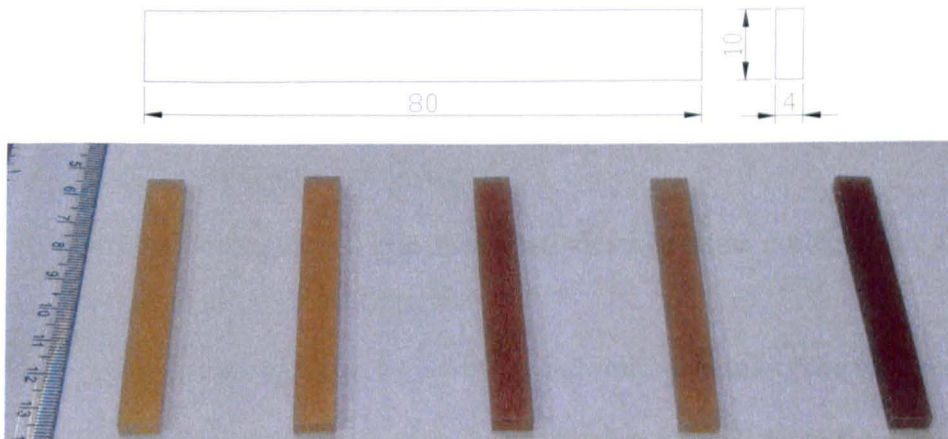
Dimensions and examples of the test specimens used in three point bending tests.
